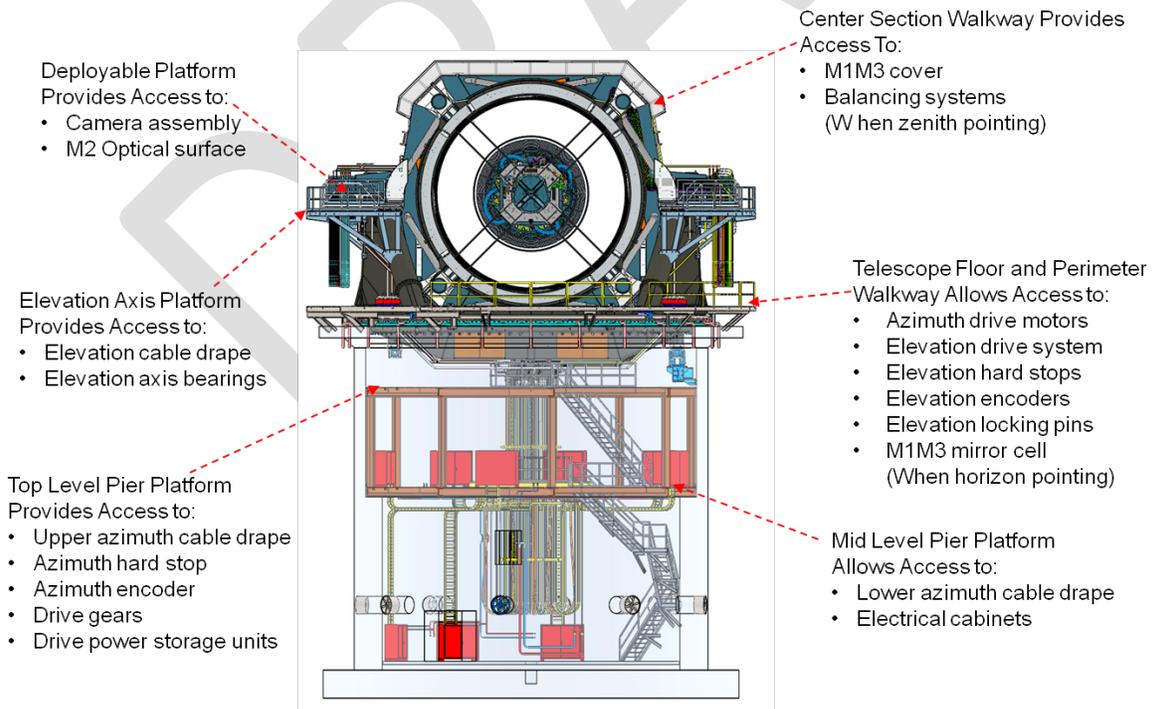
Platforms, Stairs and Ladders Provide Access to All Critical Components.
